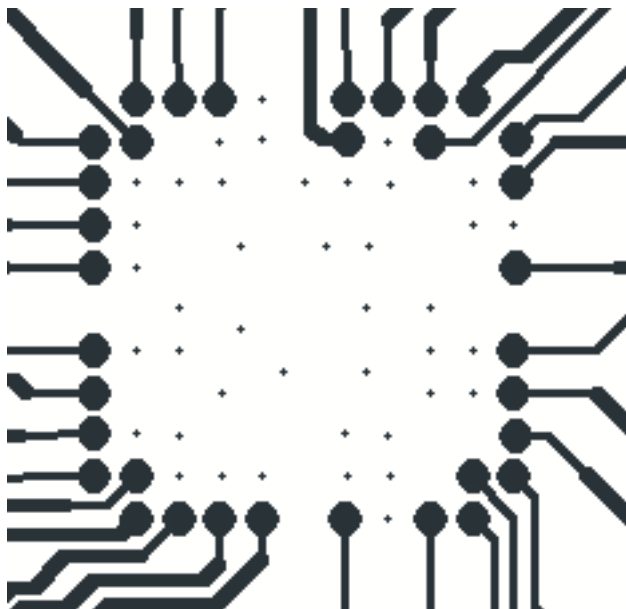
180-Pin μ BGA Six-Layer Board Routing Example (Four Routing Layers)—First Inside Layer
